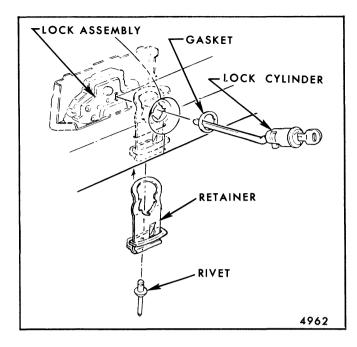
Typical Bottom Loading Lock Cylinder Retainer - Oldsmobile "B" Style Shown
